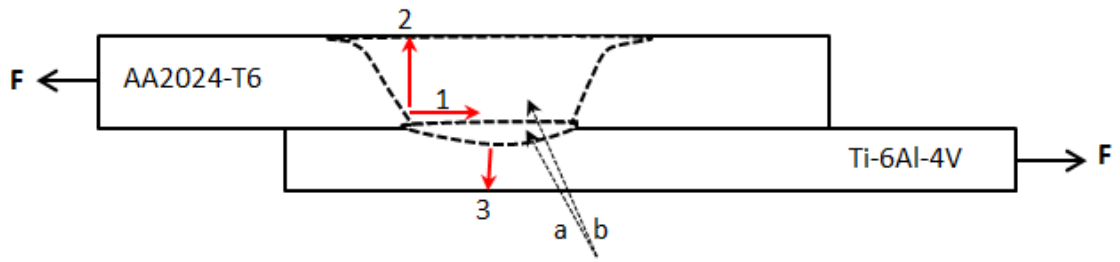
Schematic illustration of fracture paths during fatigue loading: (a) penetrated ($d_p > 0$) weld area and (b) non-penetrated ($d_p \approx 0$)
